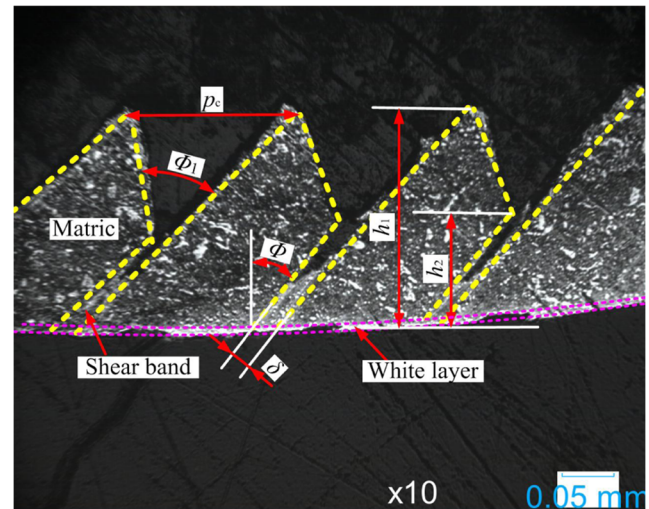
Chip morphology and measurement of a serrated chip when orthogonal cutting workpiece with 45 HRC hardness
